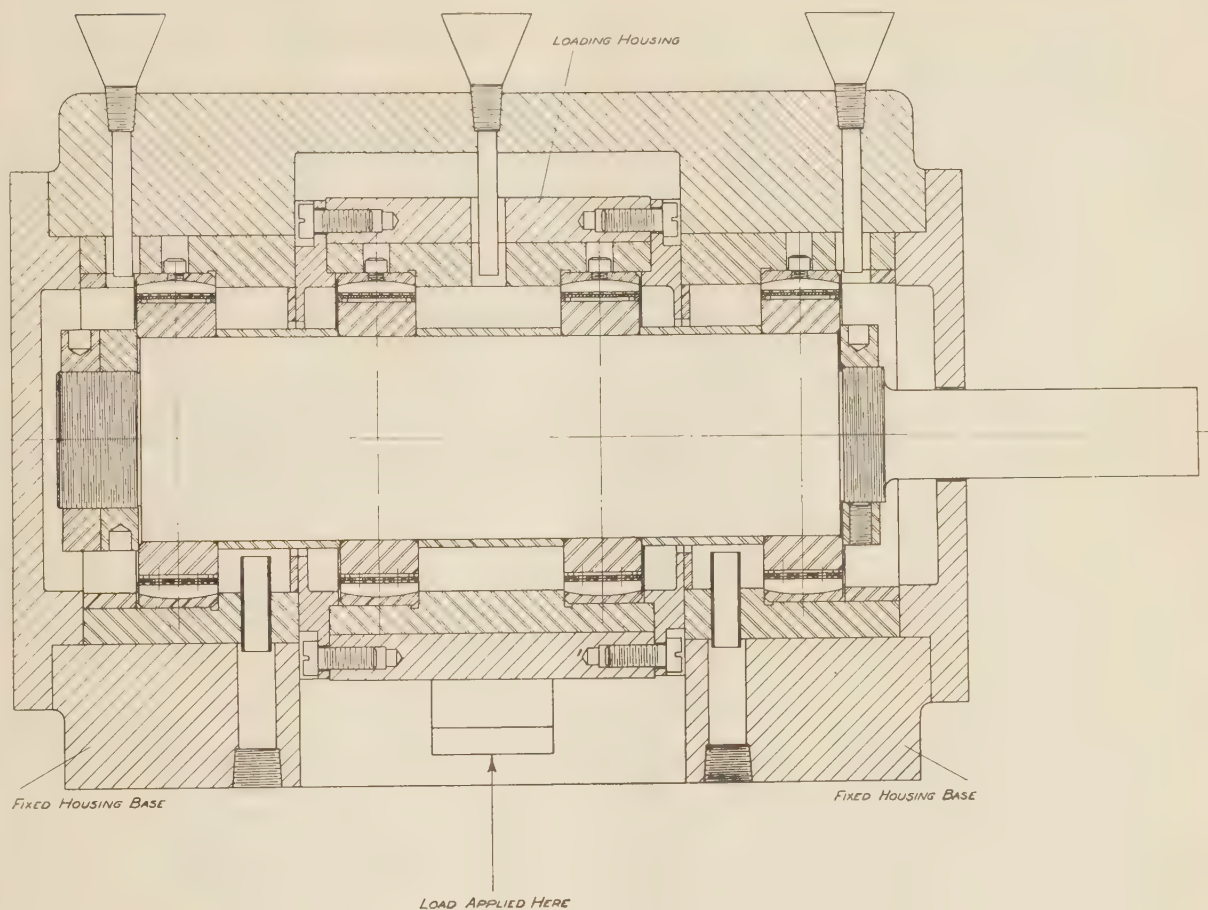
ARRANGEMENT OF FOUR BEARINGS IN BALL-BEARING TESTING MACHINE
